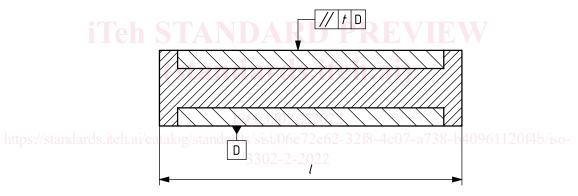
Example of a parallelism tolerance: sandwich structure
